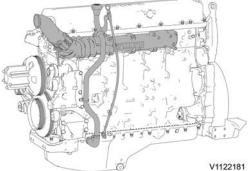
Oil filler pipe, oil dipstick, inlet manifold with preheating coil.
